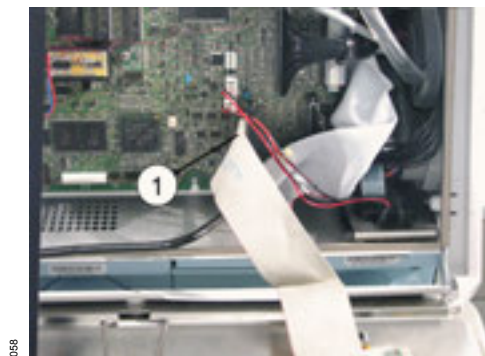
Detail view of Central Control Board: Cable connector (ribbon cable)
